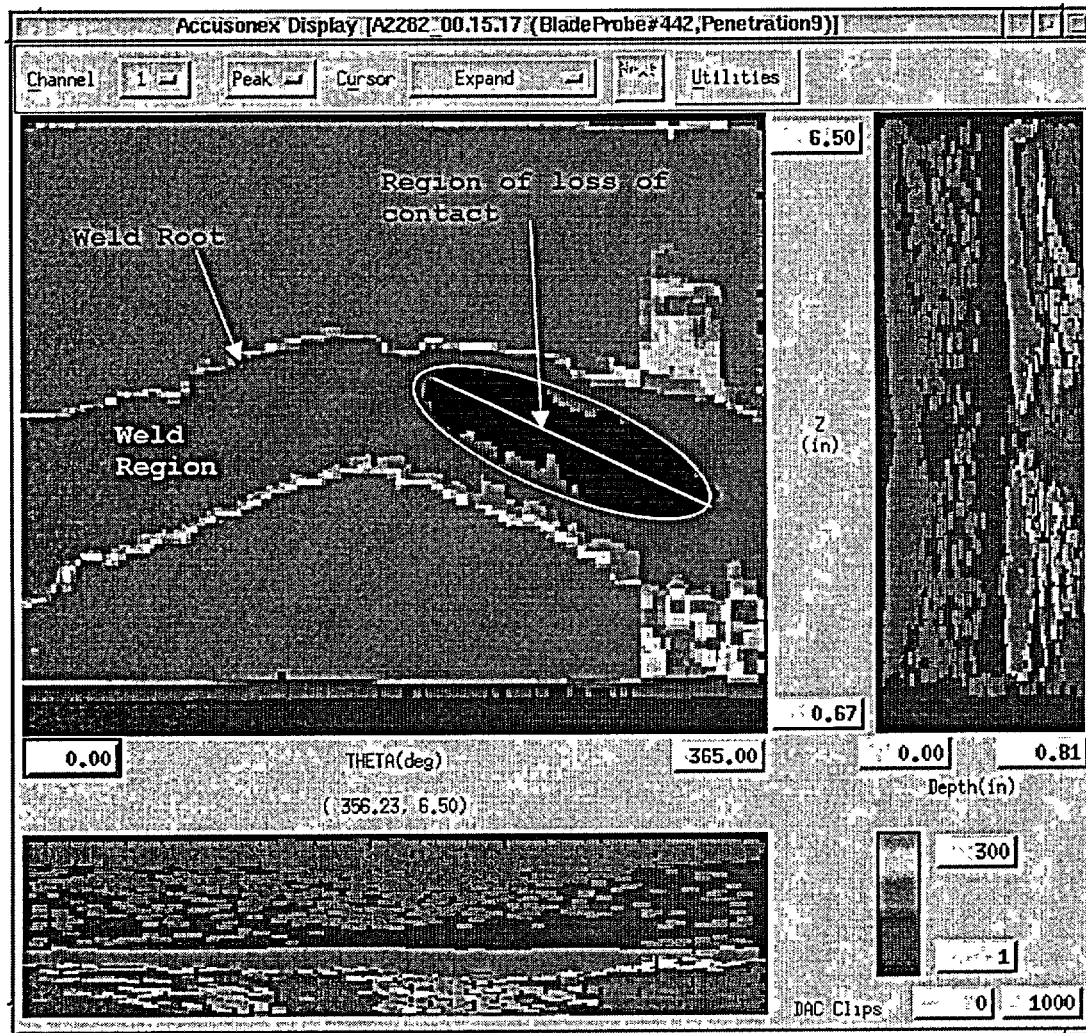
Typical UT Scan Showing Lack of Coverage Area in the Nozzle Material Adjacent to the Weld.
